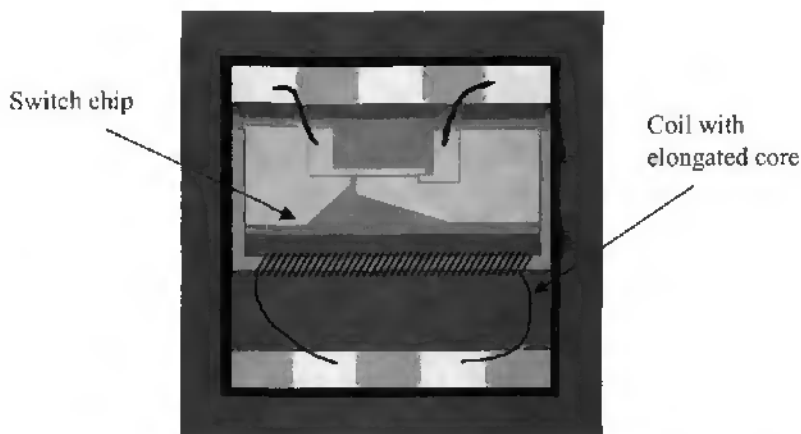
Schematic top view of the SMD packaging with the coil core connected to the switch.
